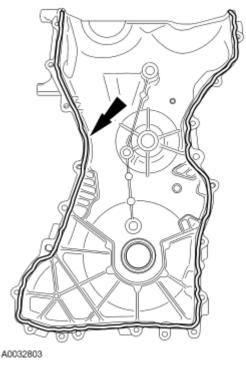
Locating Silicone Gasket Courtesy of FORD MOTOR CO.
